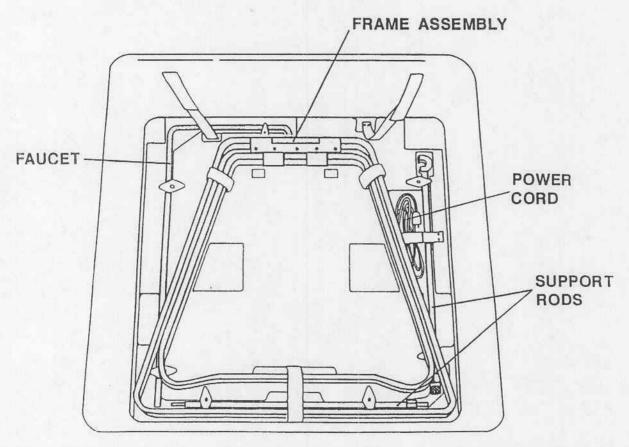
Storage of Faucet, Support Rods, 230 V Power Cord, and Frame Assembly
